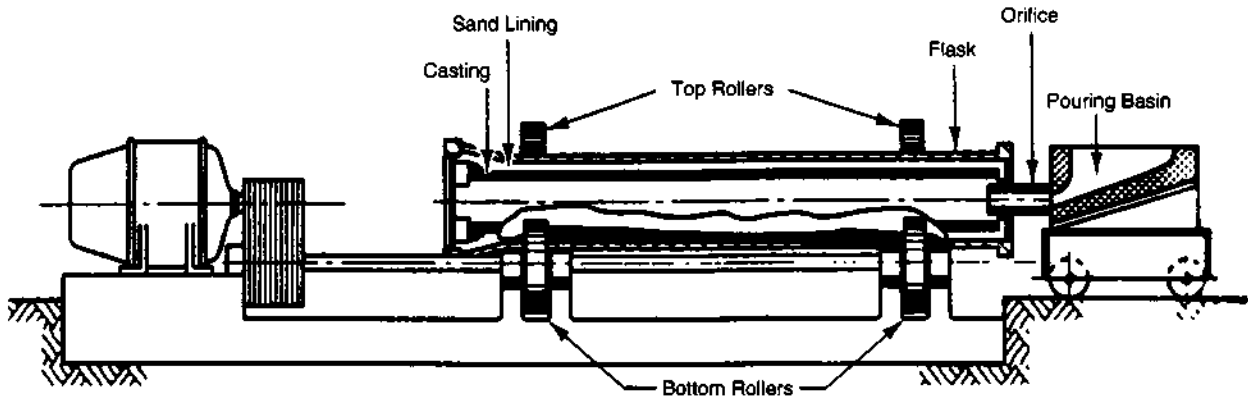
E1 A horizontal centrifugal casting machine equipped to make cast iron pipe. (Courtesy American Cast Iron Pipe Company)
